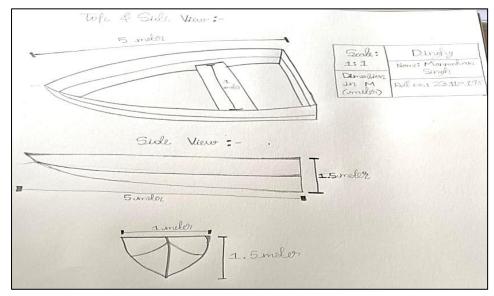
view of Dinghy with dimension drawn draw by Manmohan Singh Meena
